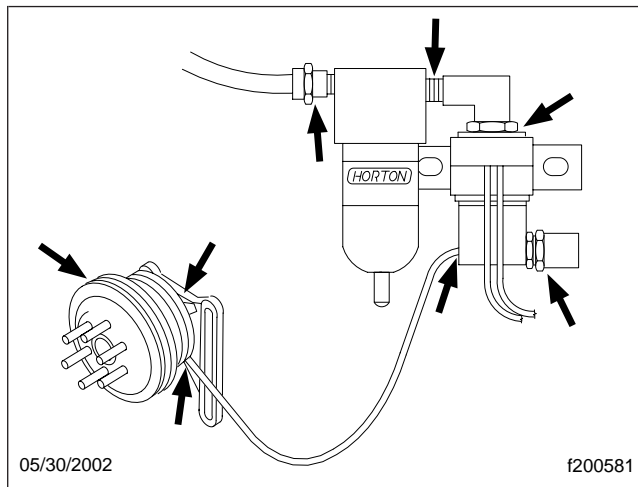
, Checking for Air Leaks (Horton DriveMaster)
